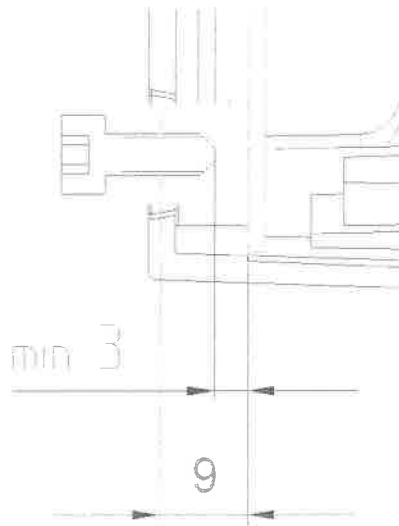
screw length for mounting shielding, PE's, ... to the earth terminal connection.
